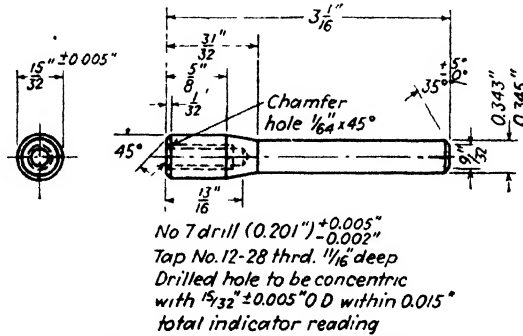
A simple-headed part in which the hole is afterward drilled and tapped. result in much waste of material and about 75 per cent higher cost.
